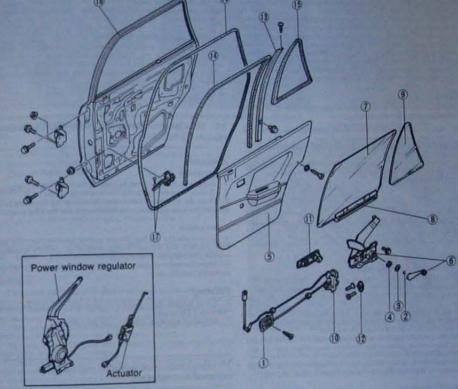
Exploded view of the rear door – September 1985 models onward (Secs 12 to 16)
